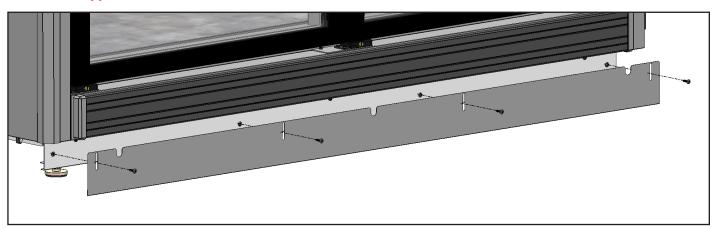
Align the front kickplate with the rivnuts in the kickplate support.
